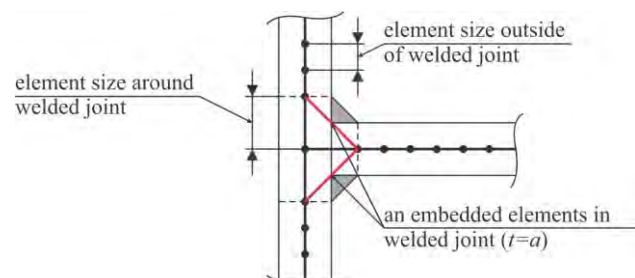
Modeling of welded joints with cross-shell elements [5]
